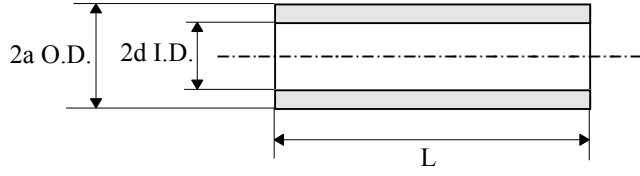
Cross-section of the cylinder bullet showing the dimensions.
